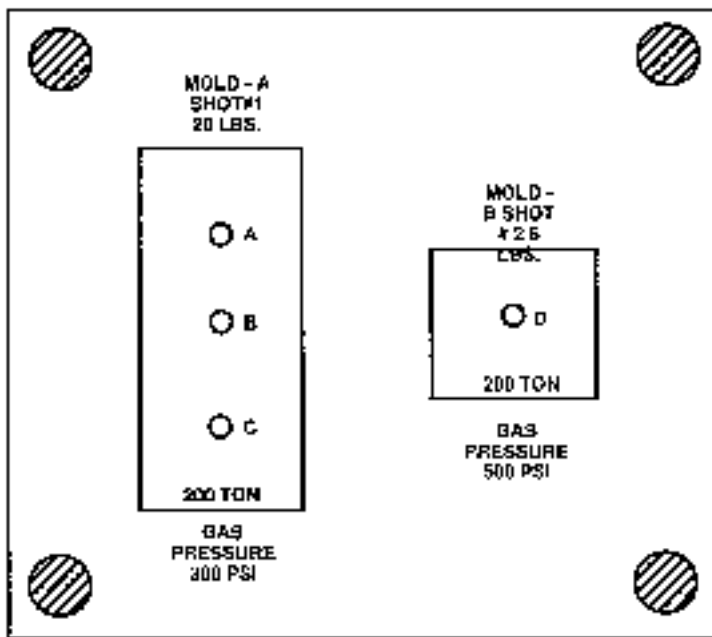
Molding multiple parts on a multi-nozzle machine
